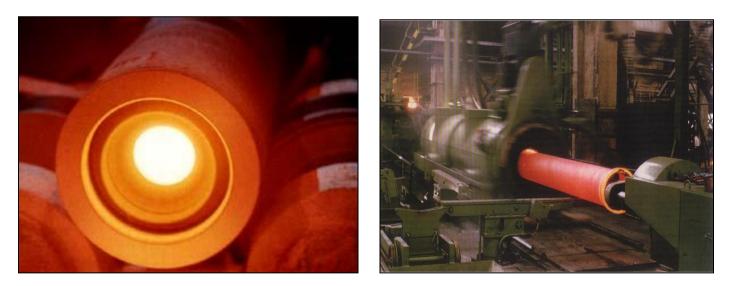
Cast (Ductile) Iron Pipe being (a) cast in a spinning mould and (b) withdrawn from the mould
